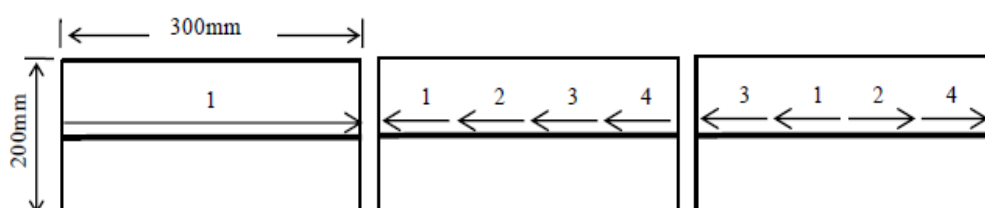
Welding sequences for thin-wall butt-welds employed in [75], from left to right: progressive welding, back-step welding, symmetric welding.
